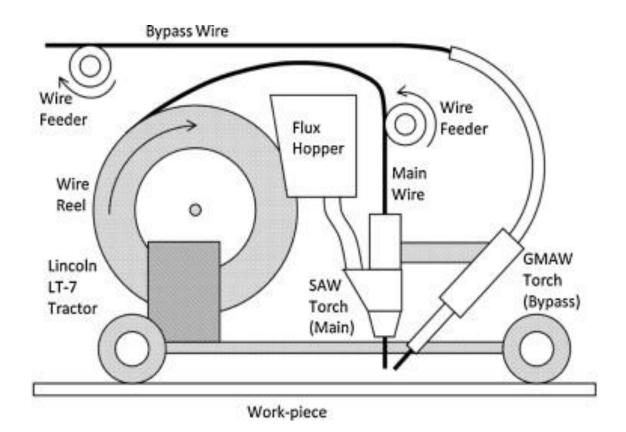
Schematic diagram of two electrode arc welding process [10]
